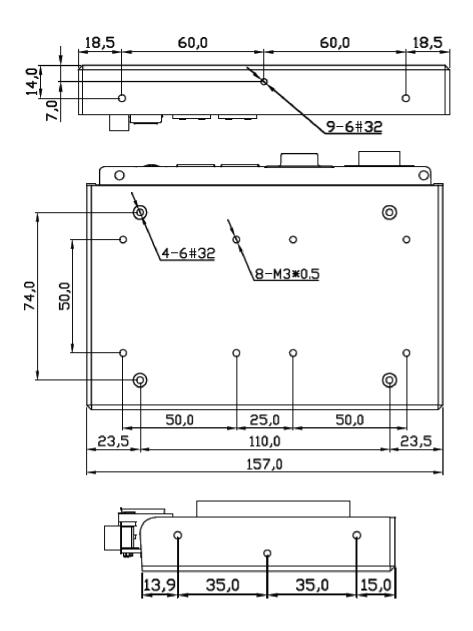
Enclosure Heat Sink Dimensions (mm)
